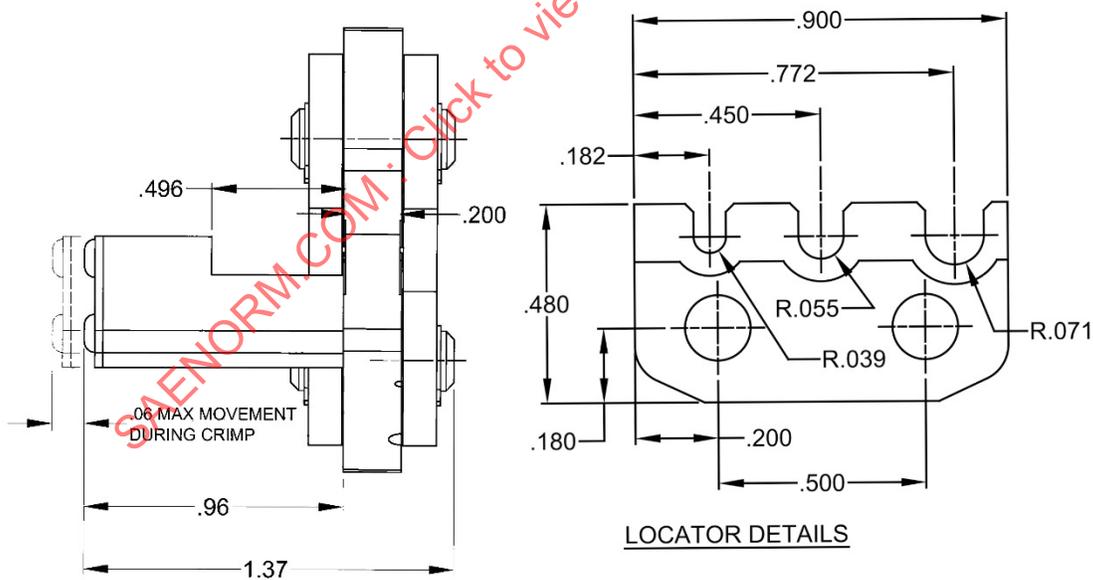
M22520/44-01 LOCATOR DETAIL
